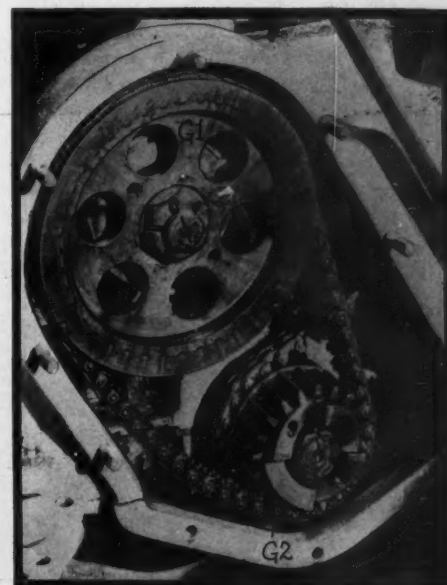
Two silent chains are used on the Stearns-Knight motor; one chain drives the eccentric shaft from the front end of the crankshaft and the other chain drives the shaft carrying the water pump and magneto.
